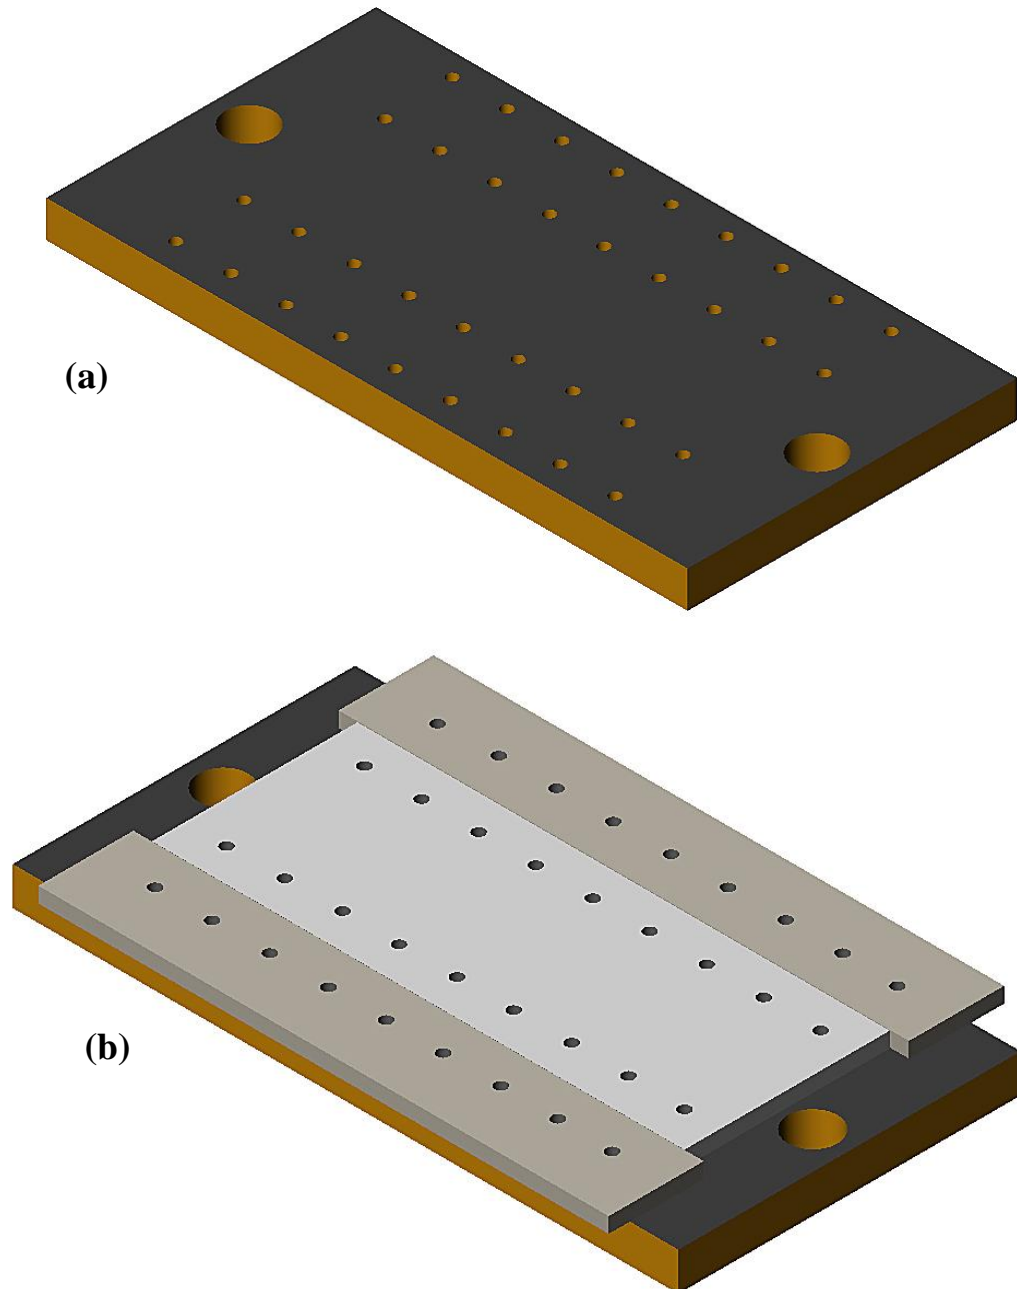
Assembly representation of final clamping system used. (a) backing plate with threaded clamping holes, and (b) the plates placed over backing plate
